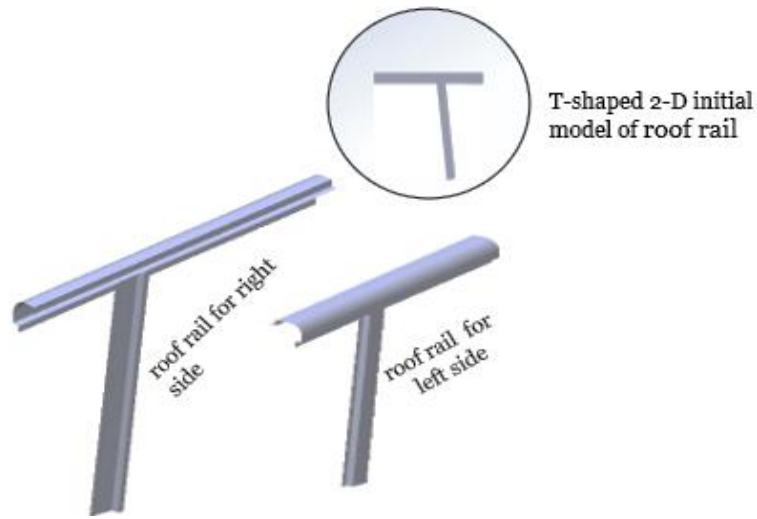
shows the model of Side roof rail of Bajaj Qute structure
